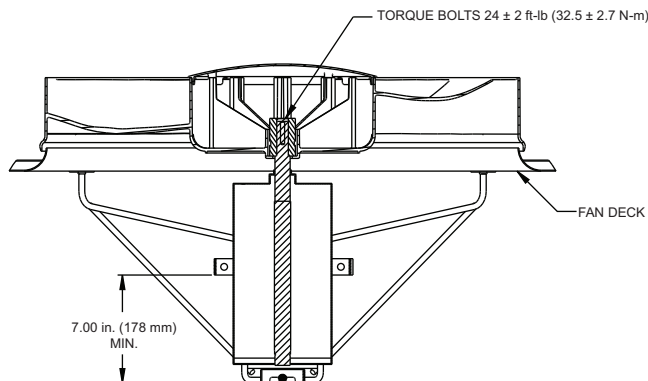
Aeroacoustic Fan (Black Bolt) Mounted Position
